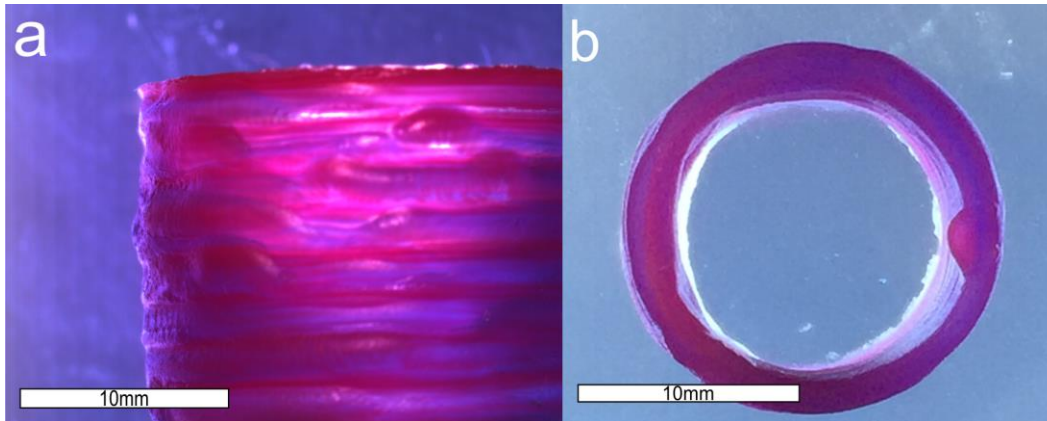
, A side (a) and top view (b) of the three-ink cylinder print
